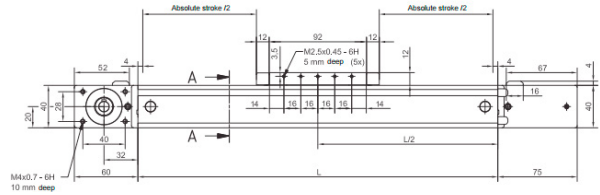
Side view of a mechanical drawing for a belt driven linear module.
